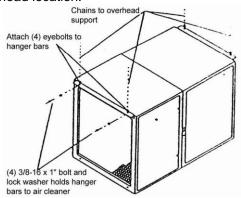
MOUNTING F66 OVERHEAD F73 USES 3/8" EYEBOLTS PROVIDED
